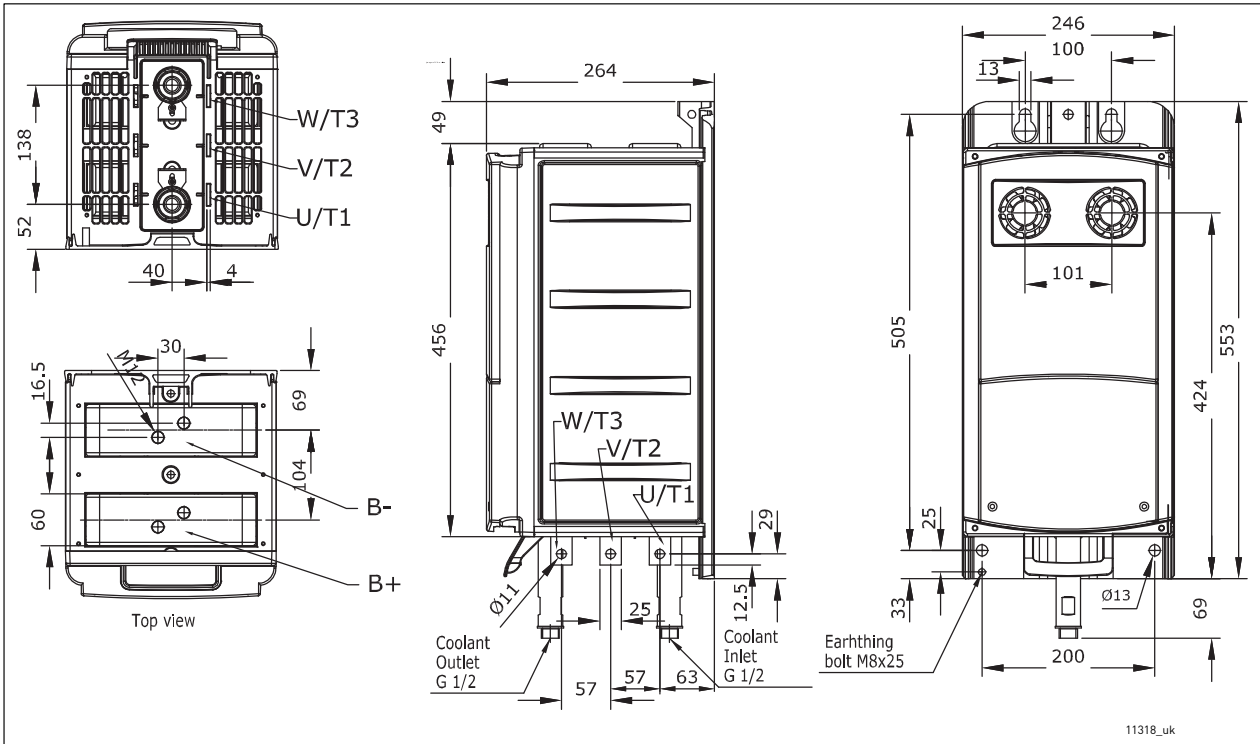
VACON® NX Liquid-cooled dimensions, CH5 inverter
